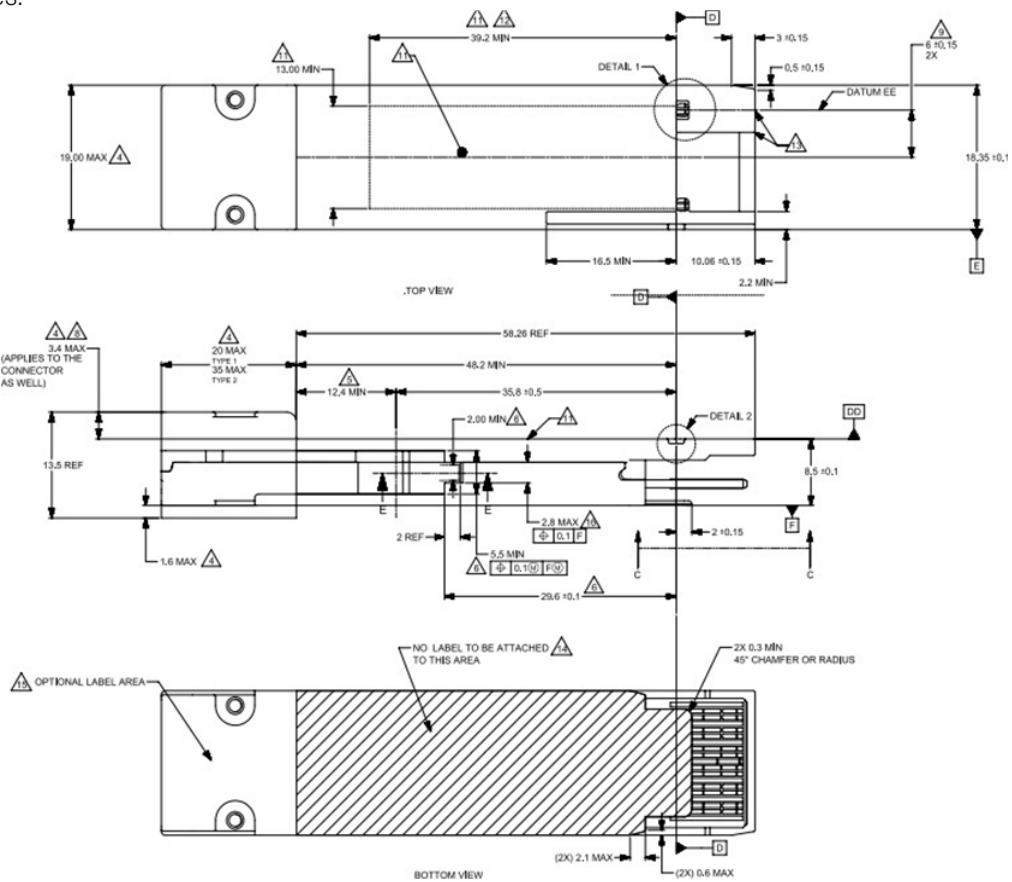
FTCE4516E1PxM Mechanical Dimensions.
